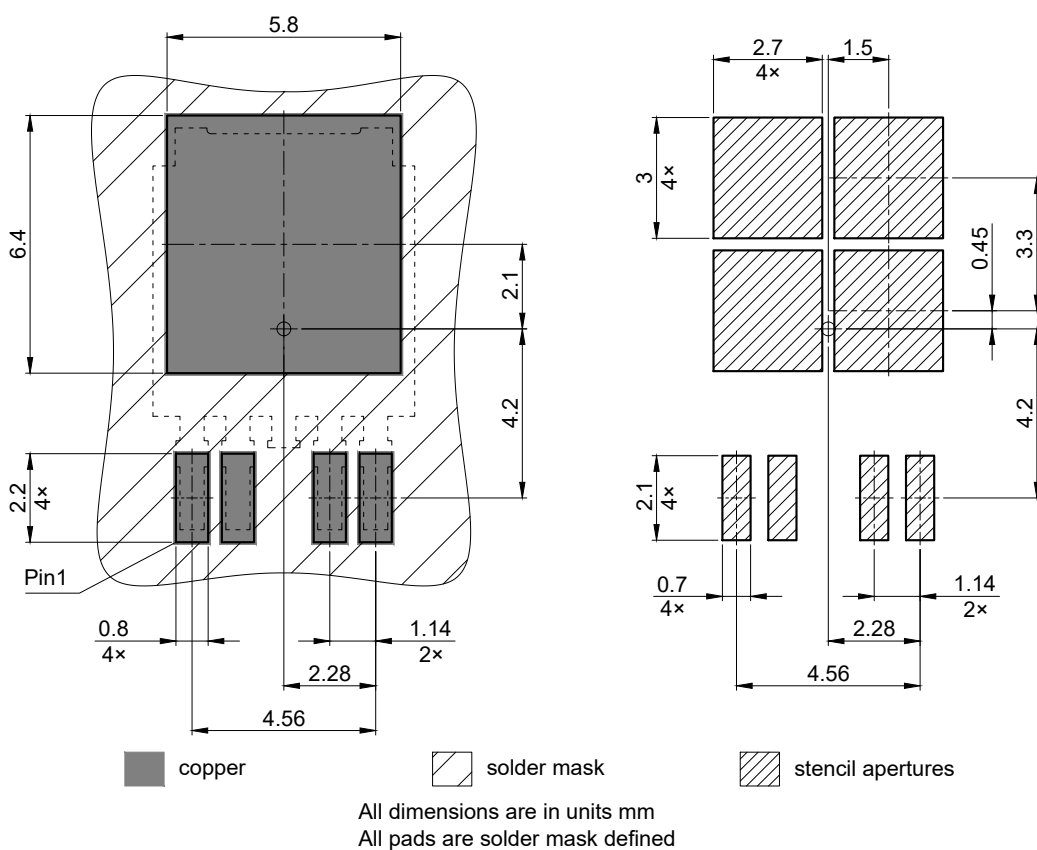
Footprint drawing PG-T0252-5, dimensions in mm
